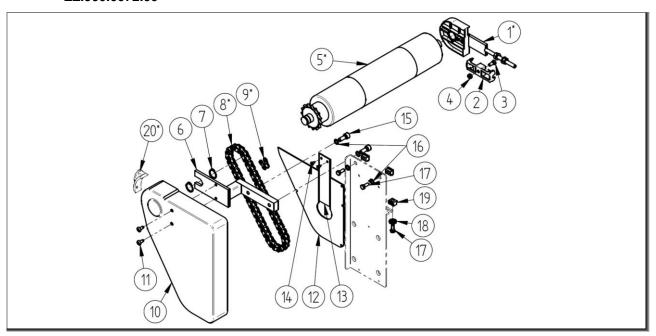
Parts list: External drive unit (positioned underneath) - drive unit - position of drive unit 14 - ZZ.900.0072.00
